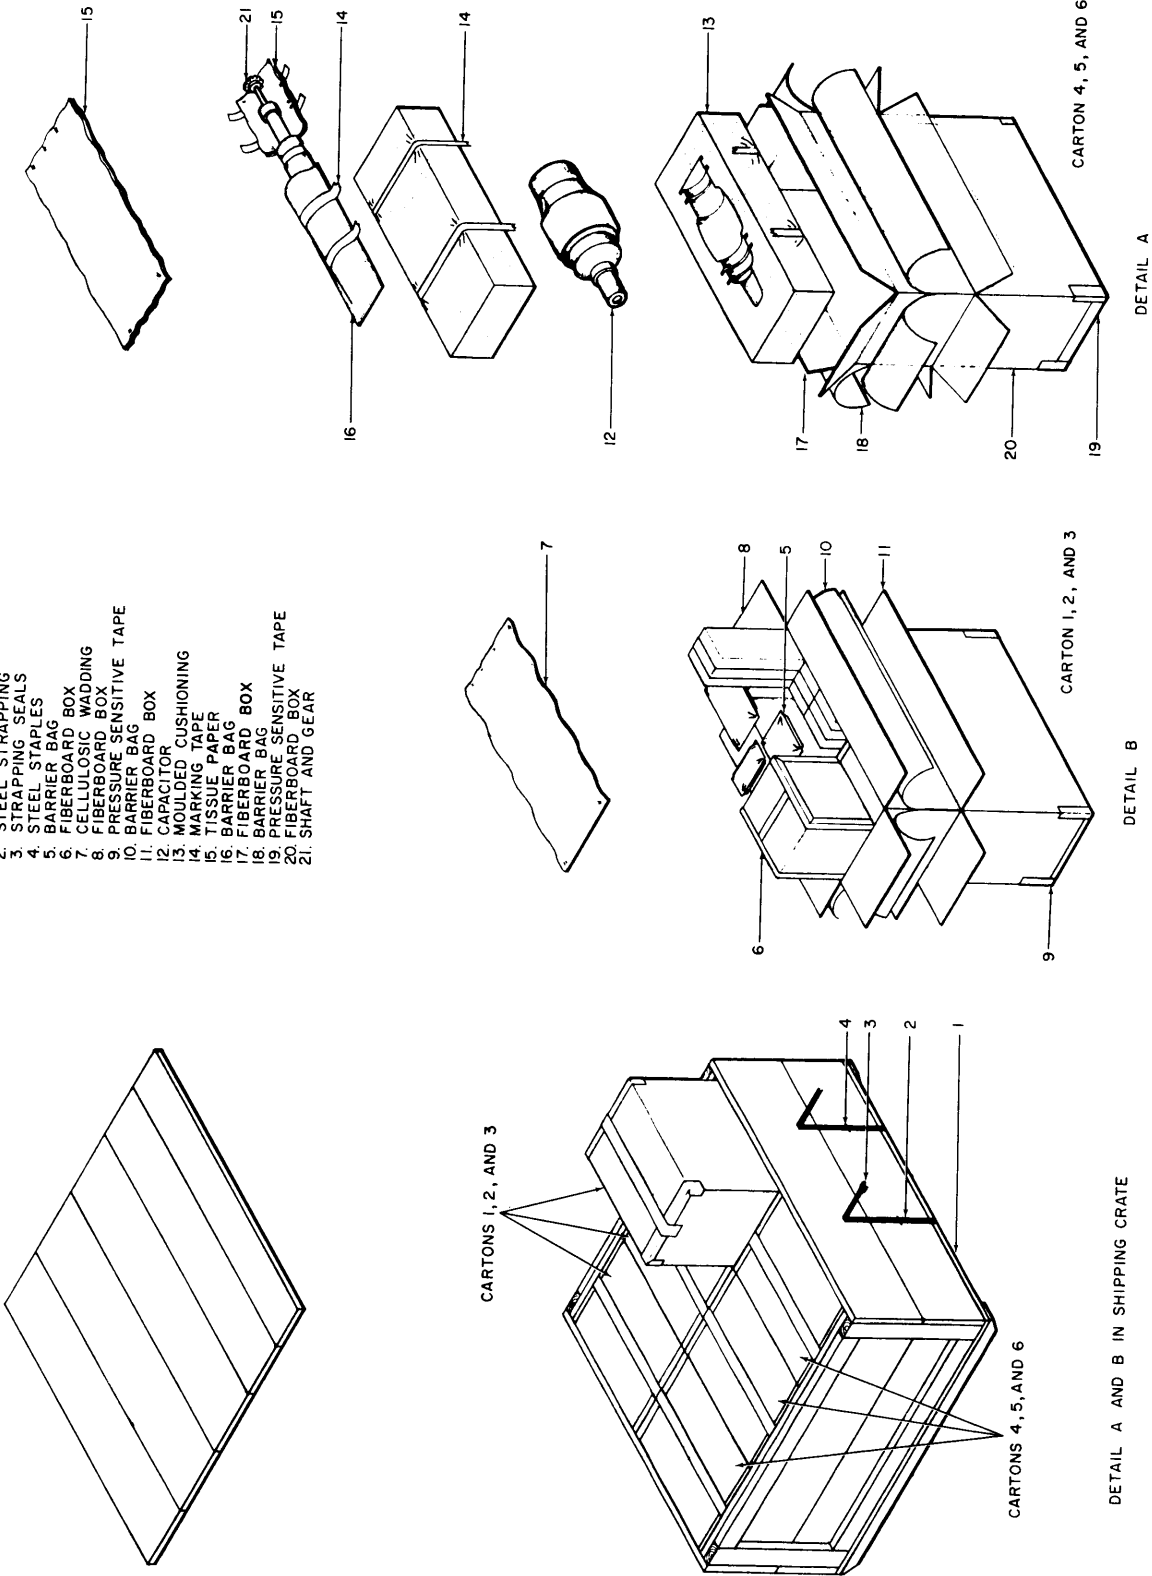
Typical Equipment Packaging (Sheet 1 of 4).
